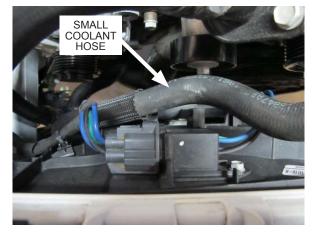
t: Detach coolant hose and unplug radiator fan connector
